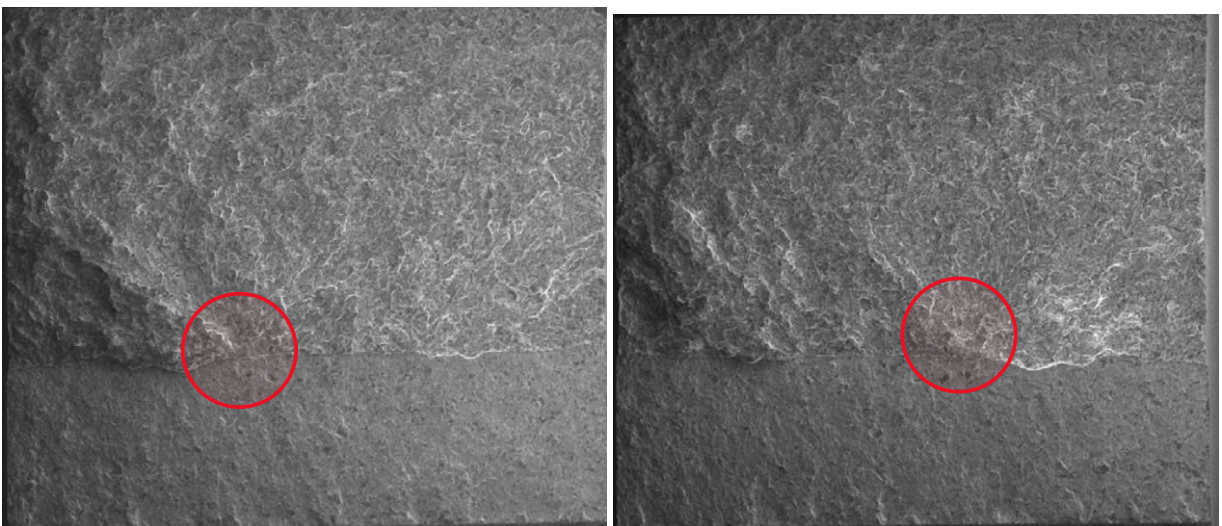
Left and right fracture surface of irradiated SE(B) specimen C23R, manufactured from a CVN specimen, showing predominantly cleavage fracture. The primary cleavage fracture initiation region is marked by a red circle. The surface roughness indicates a K_{Jc} value around 100 MPa√m. The fatigue surface contains patches of intergranular fracture, but intergranular fracture is not visible in the cleavage fracture region. Fatigue crack growth is controlled by a strain accumulation mechanism, and this makes fatigue crack growth more sensitive to grain boundary fracture. Cleavage initiation occurs in a region without special features, but there are isolated regions of grain boundary fracture in the cleavage region. This indicates some grain boundary segregation, but grain boundary fracture did not affect the cleavage
